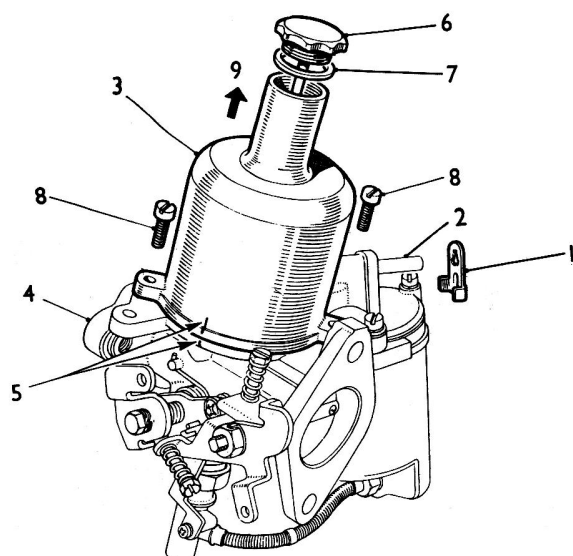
DISMANTLING THE HS6 CARBURETTOR - STAGE 1
